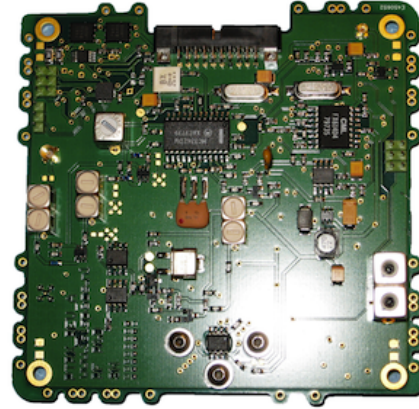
The STX (small PCB) connected to its interface board (large PCB)
